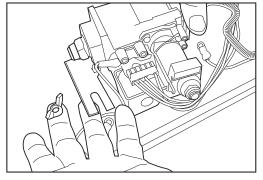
Remove wing nuts from each of the control valve holding brackets and remove valve.
